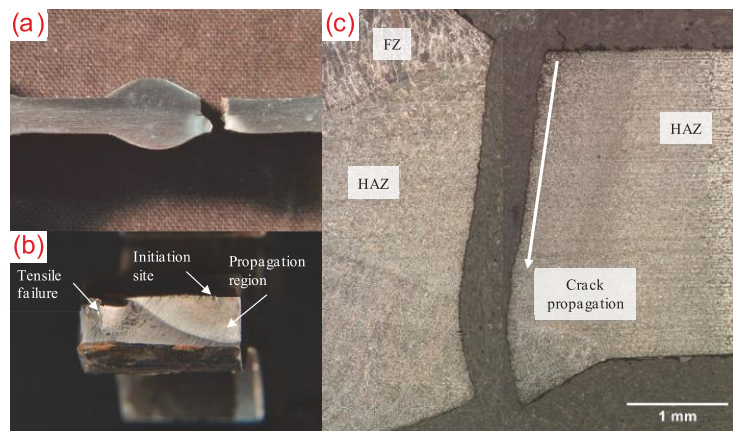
Fractography of failed specimens: (a) side view showing characteristic failure from weld toe; (b) fracture surface; (c) cross-section transverse to crack propagation direction.
